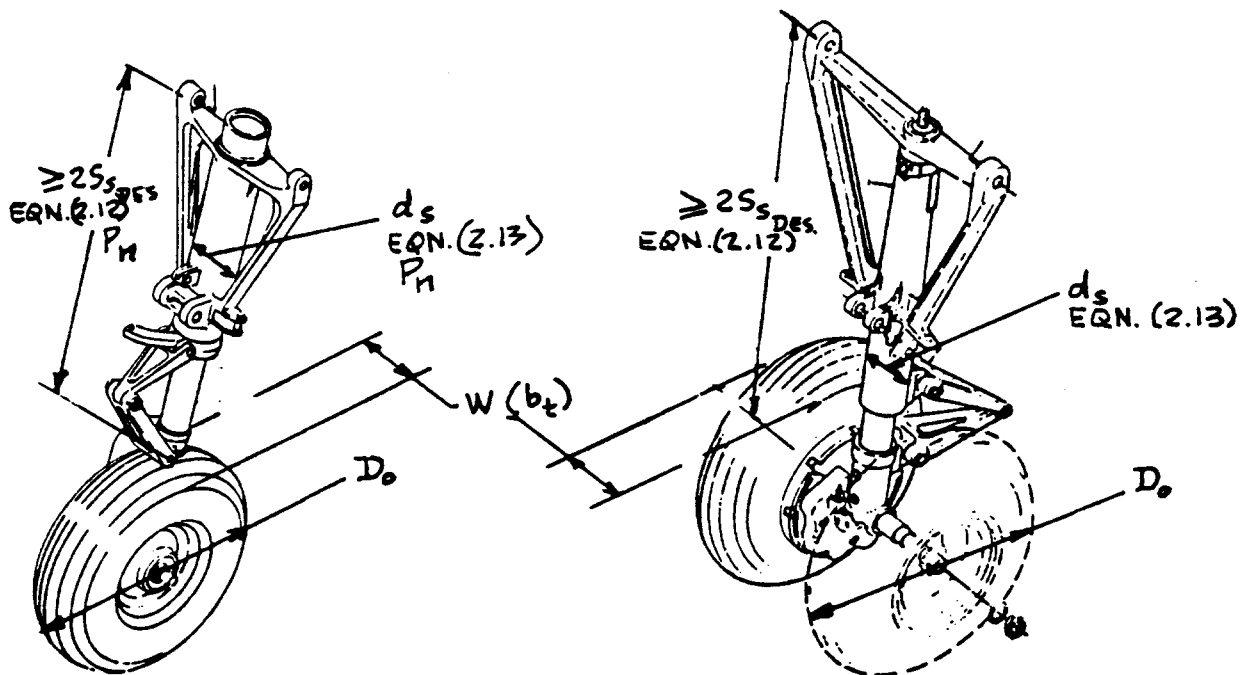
Summary of Important Dimensions of a Nose Gear
